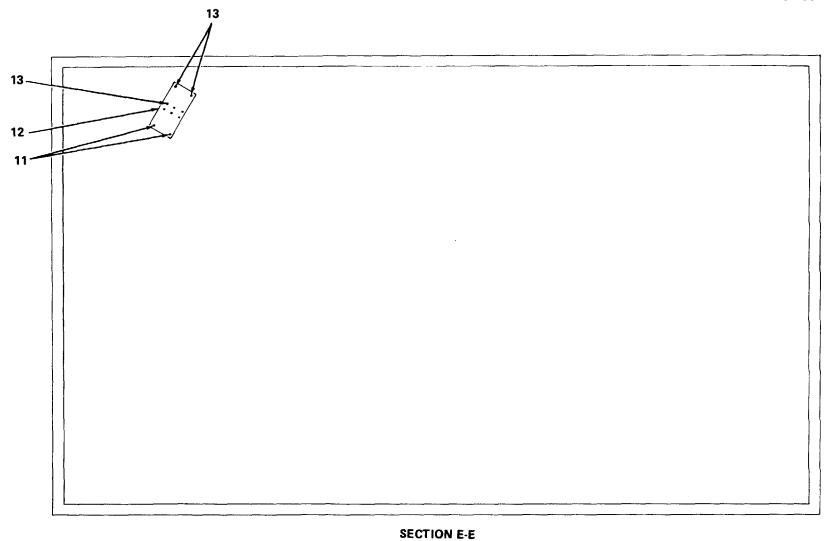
Electrical Equipment Shelter, S-389/MSA-34 (Modified)(Sheet 6 of 6)
